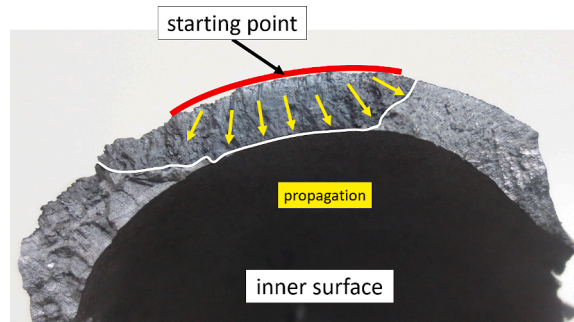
Engine B1 – left-hand side exhaust manifold, detail of the through crack.
